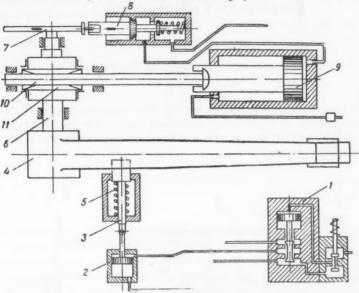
Diagram showing the operation of the marking machine: 1) Solenoid valve; 2) locking device cylinder and piston; 3) rod; 4) arm with type box; 5) spring; 6) shaft; 7) feeler; 8) distributor rod; 9) p iston; 10) rack; 11) pinion.
